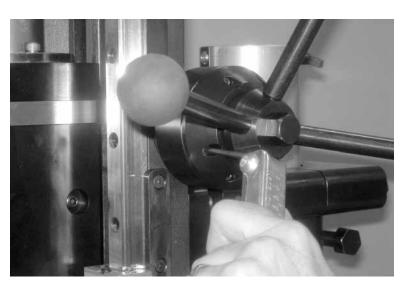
Remove the screws holding the feed cap and handle assembly.
